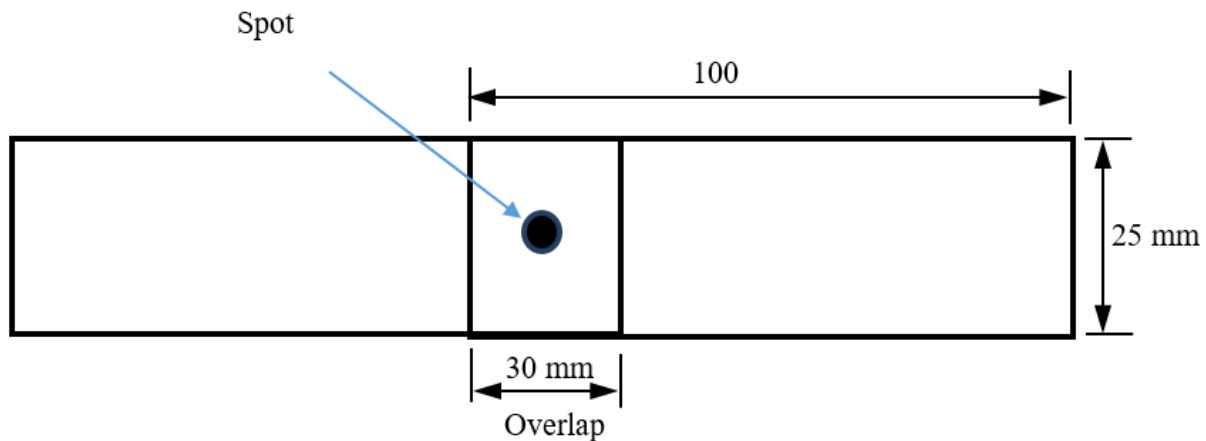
(a) Layout of sample preparation weld location is centered
